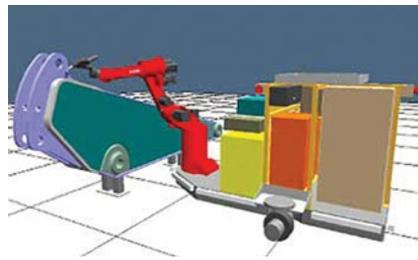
Schematic diagram showing autonomous robot vehicle navigated by vision system, being used for all positional MIG / MAG welding
